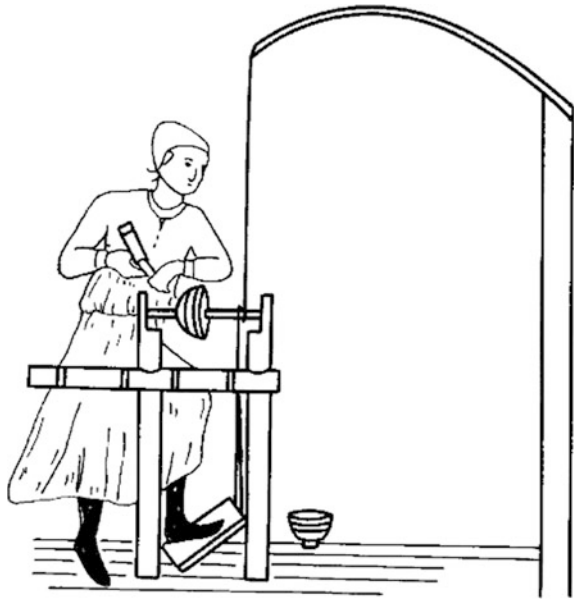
Lathe cutting wooden workpiece in 1300 BC, Egypt
